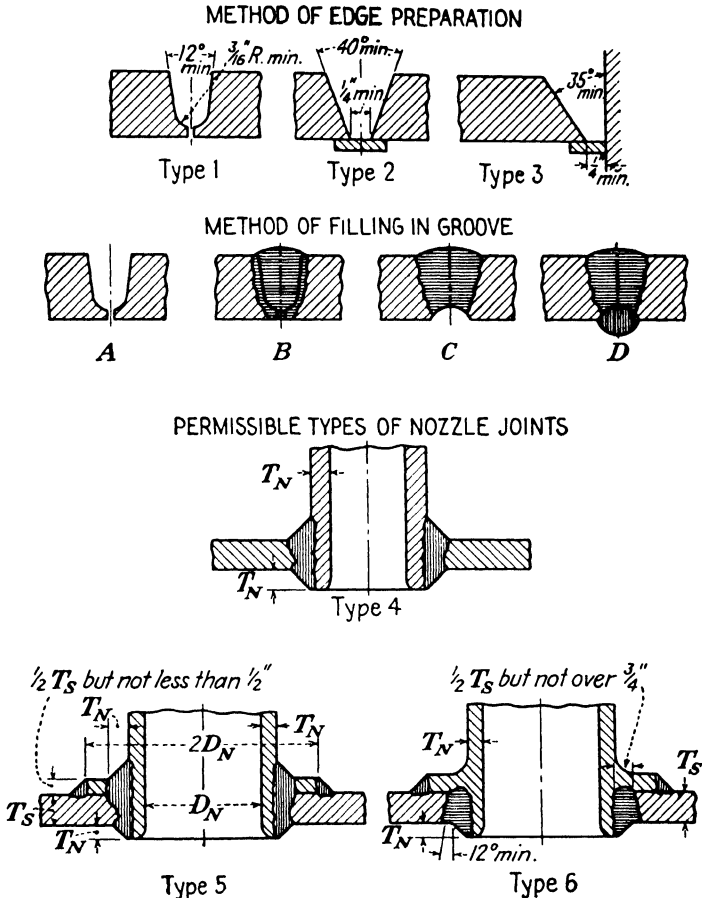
Types of welded joints. Hiemke.⁽²²⁾
